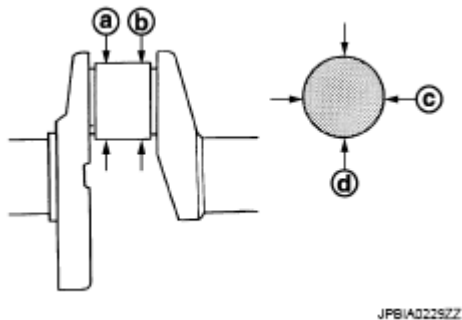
Identifying Crankshaft Out-Of-Round And Taper
